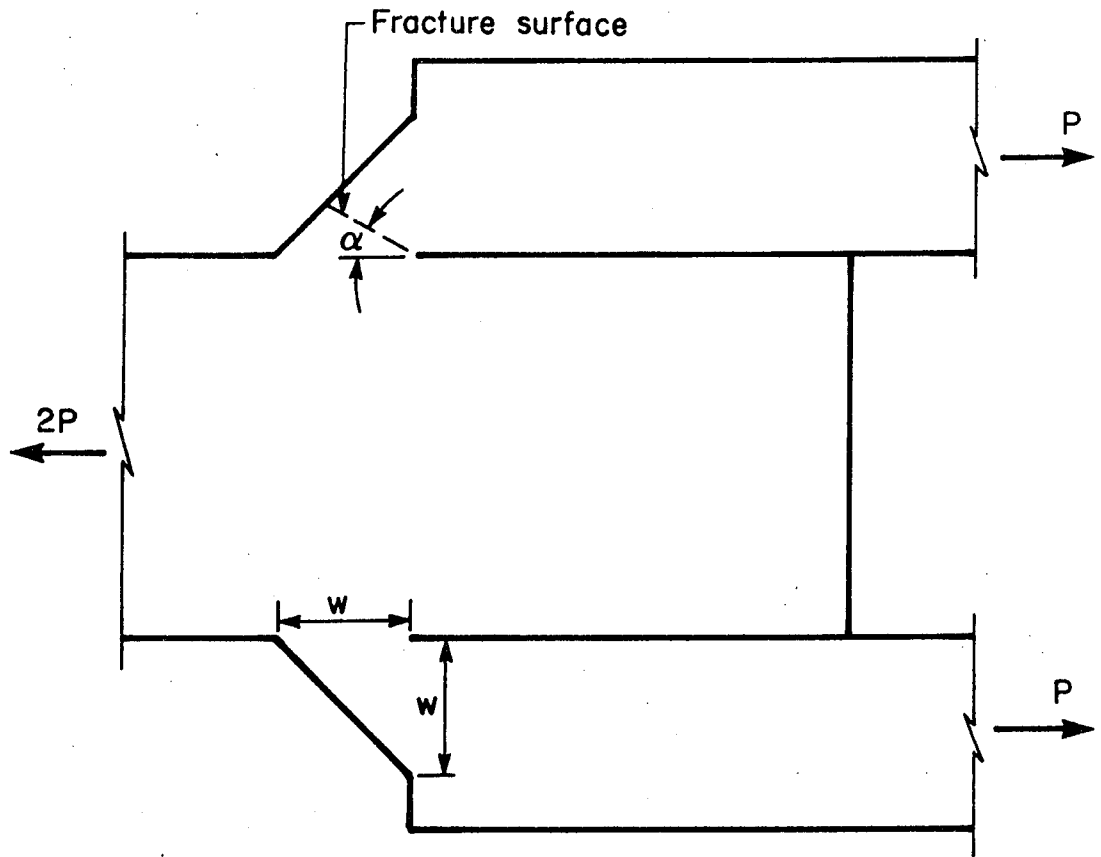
Elevation Of Fillet Weld Specimen
